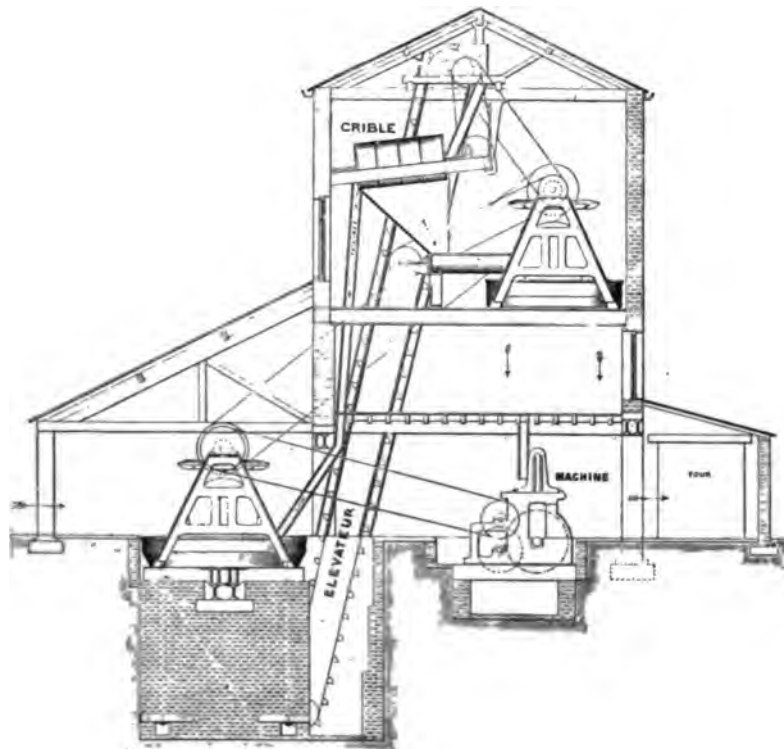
Type of Installation for Manufacture with Dry Clay.
